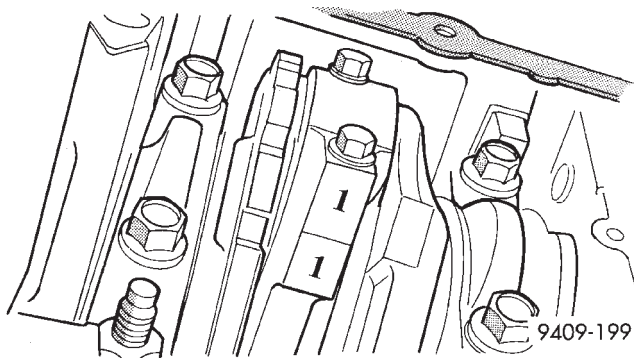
IDENTIFY CONNECTING ROD TO CYLINDER
